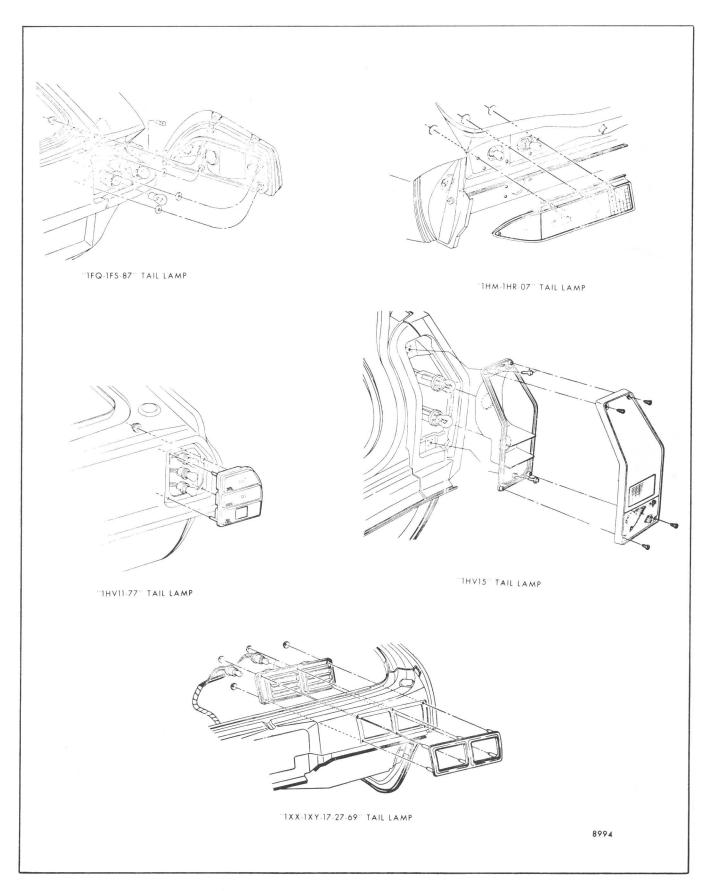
Exterior Lamp Installation - Chevrolet Styles
